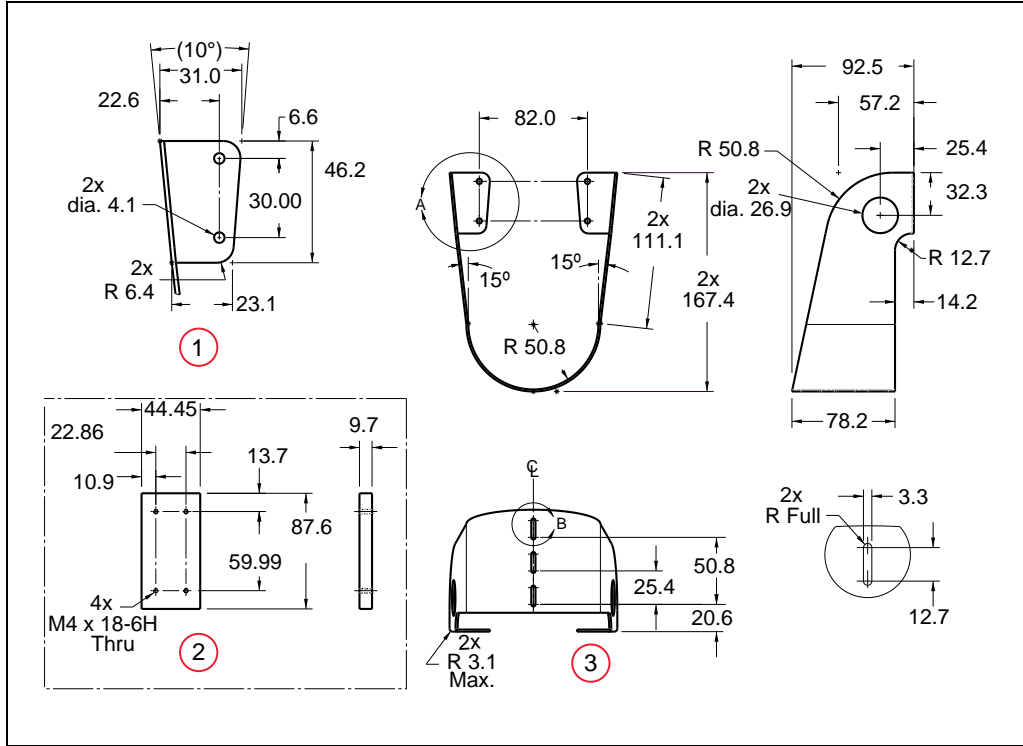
Camera Bracket Drawing, 2 of 2 (Units in mm)
